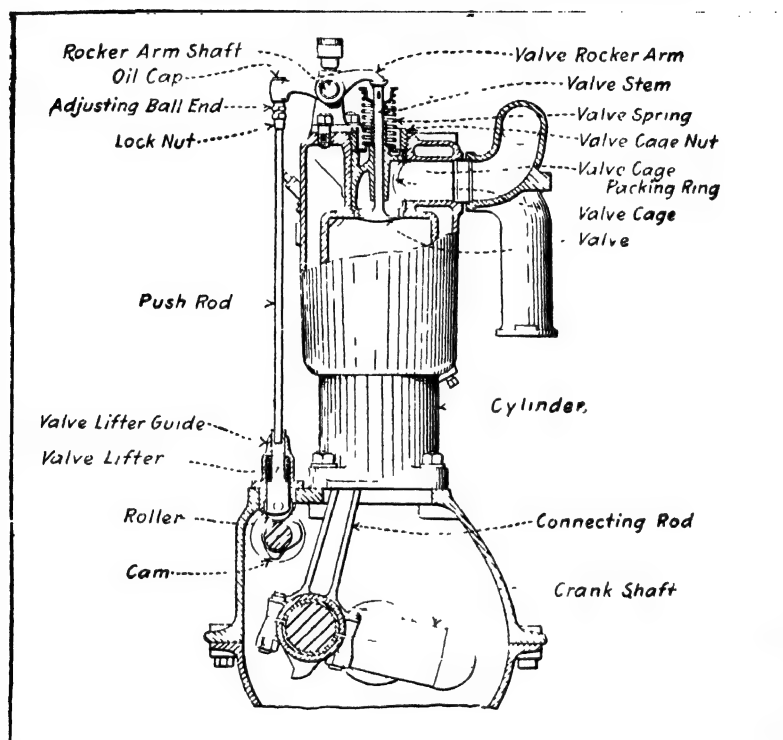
Sectional View of Early Buick Automotive Engine Cylinder, Showing Valve and Cage Installation. A Construction Now Used Only on Large Marine and Stationary Engines.
